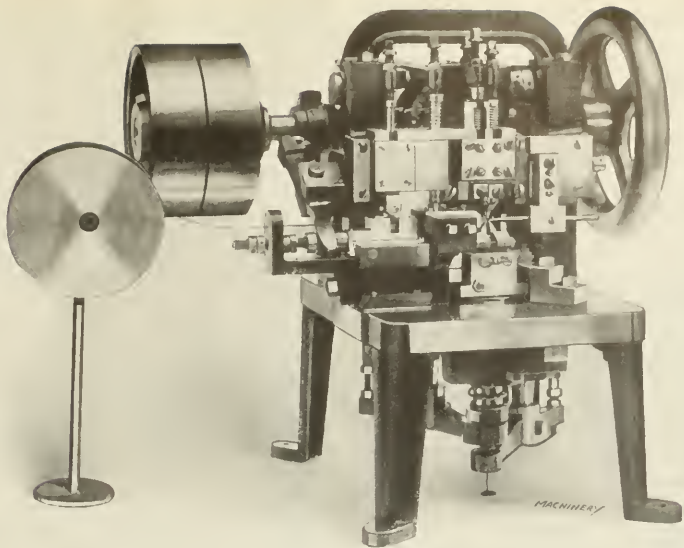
Front View of Lind Automatic Chain Making Machine, showing Stock Reel and Forming Tools
